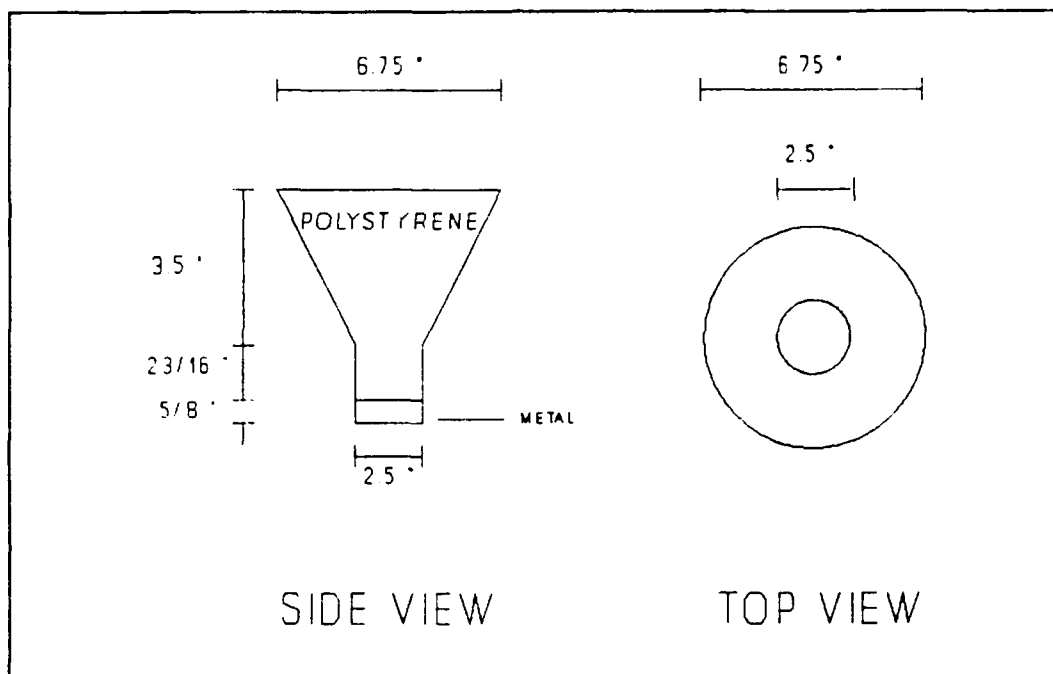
Polystyrene Mounting Fixture (All Dimensions are in inches)
